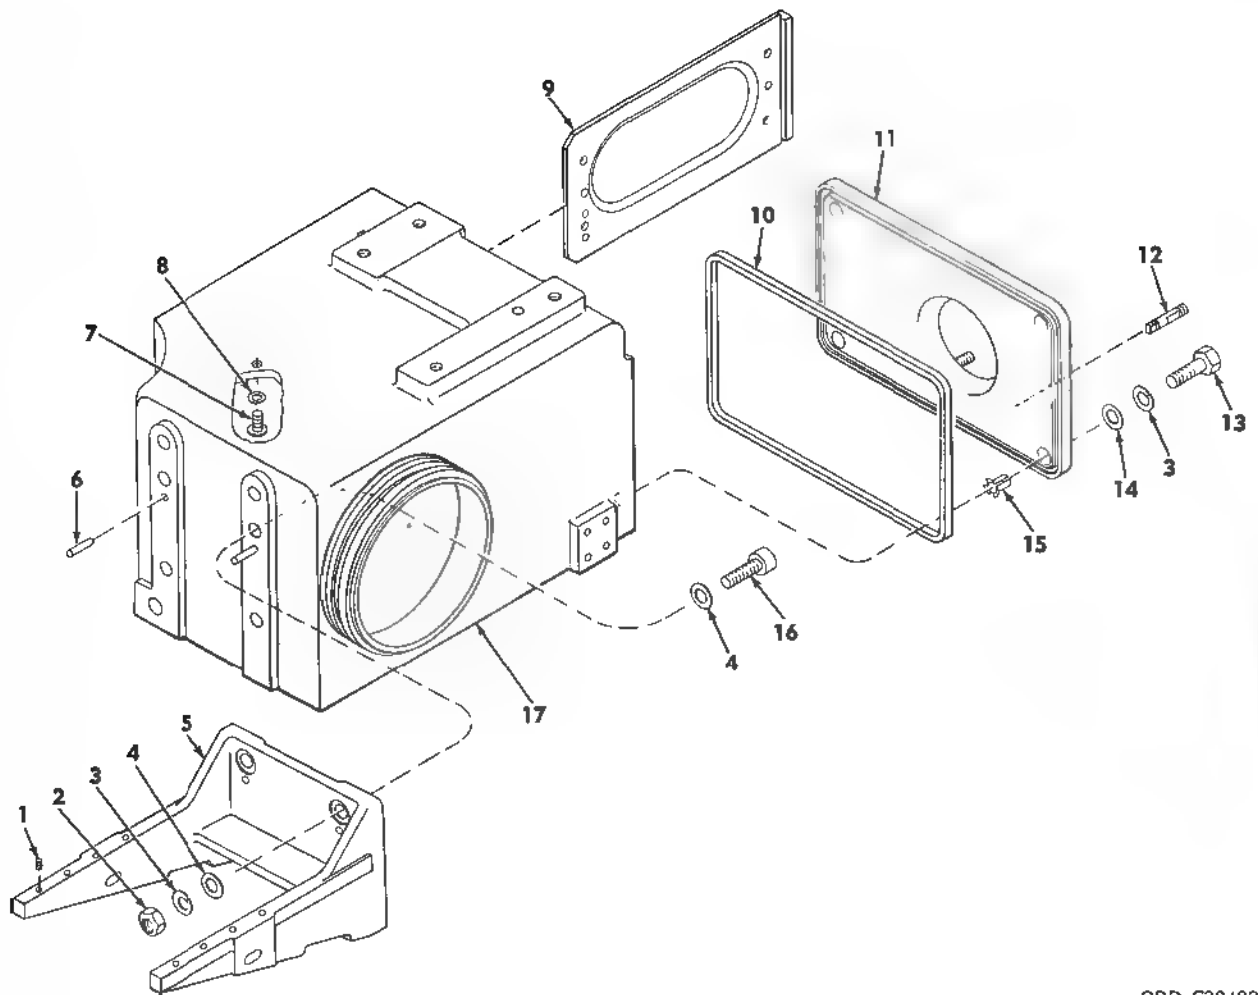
WAVEGUIDE ASSEMBLY /9141832/-PARTIAL EXPLODED VIEW
